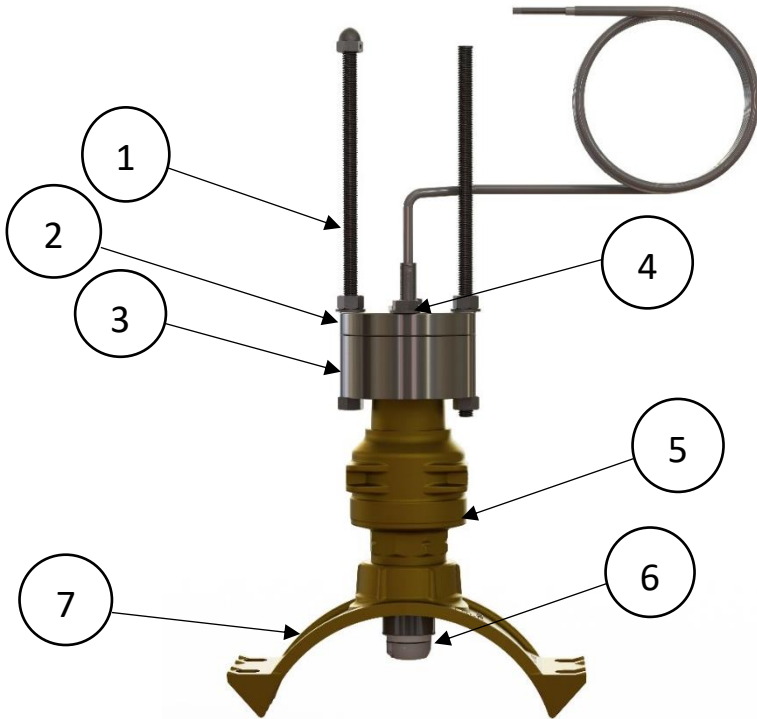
Drinking Water unit installed in pipe and detail of installation components.
